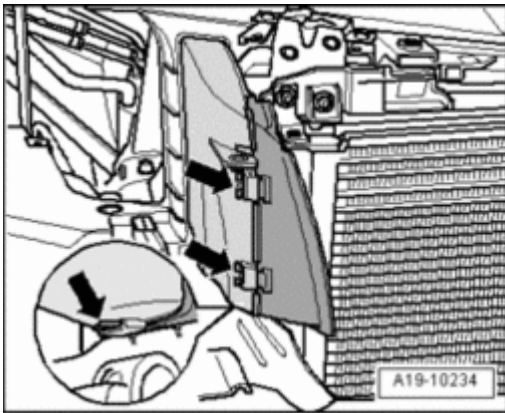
Depressing Locking Mechanisms And Removing Air Guide At Right Front From Lock Carrier
